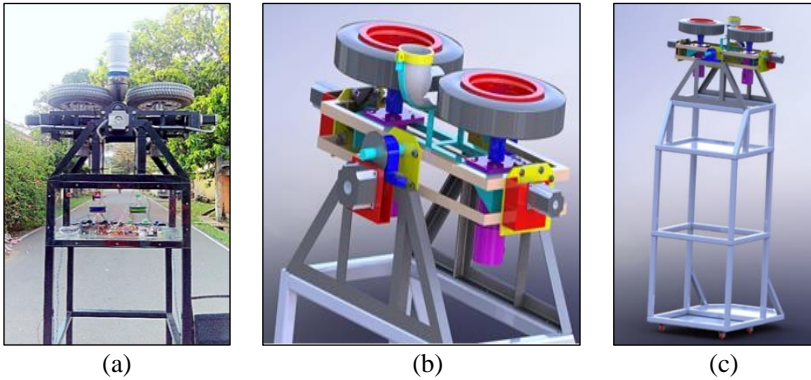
Developed cricket bowling machine; (a) complete machine design, (b) wheel assembly, and (c) fabricated cricket bowling machine
